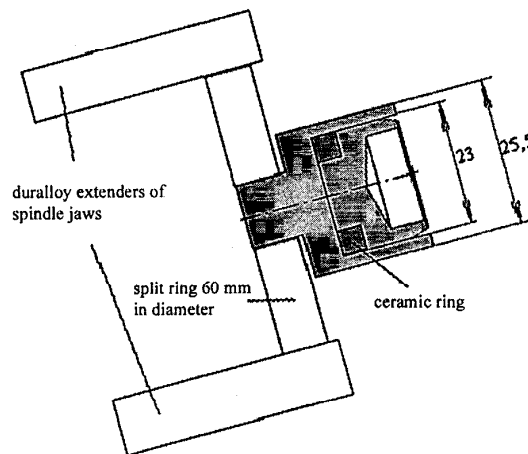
Geometry of welding of sample with inserted ceramic ring.
